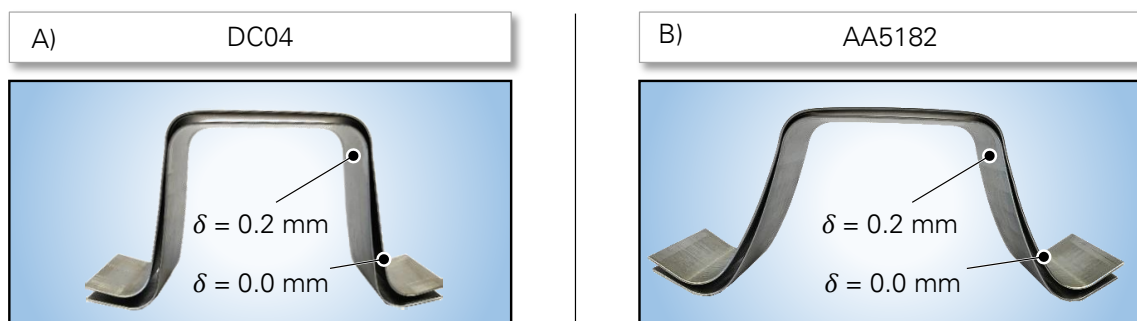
Springback behaviour of the workpieces with and without alternating bending for A) DC04 and B) AA5182 [148]
